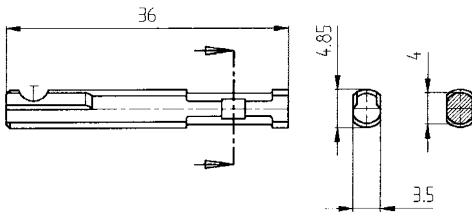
MIM “coupling”, ready to use, injection molded and sintered
